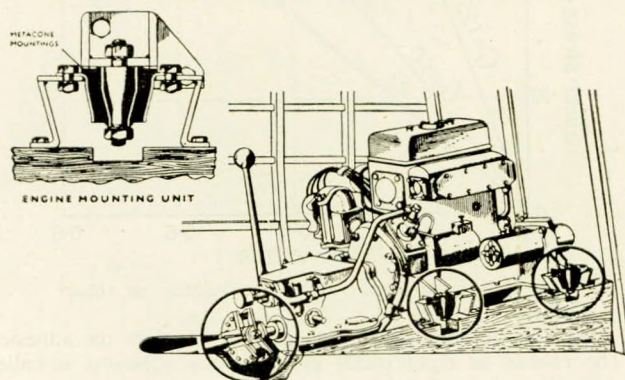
The Metacone system for flexibly mounting a small marine engine; also rubber type couplings
